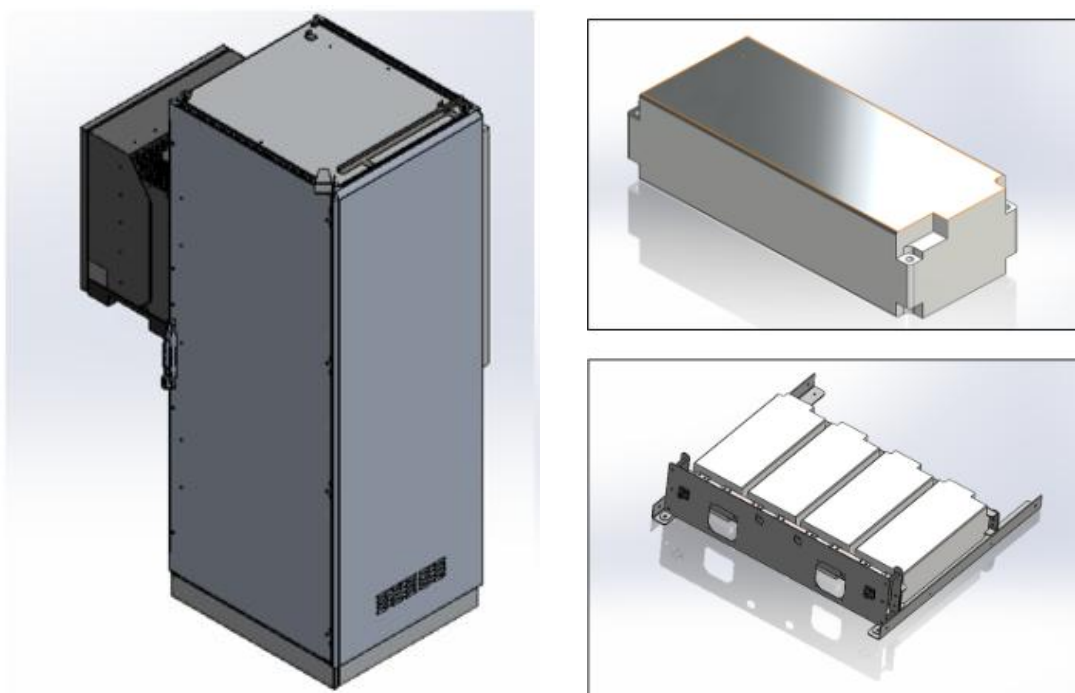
The CAD design of the BESS components: cabinet, module, sliders
